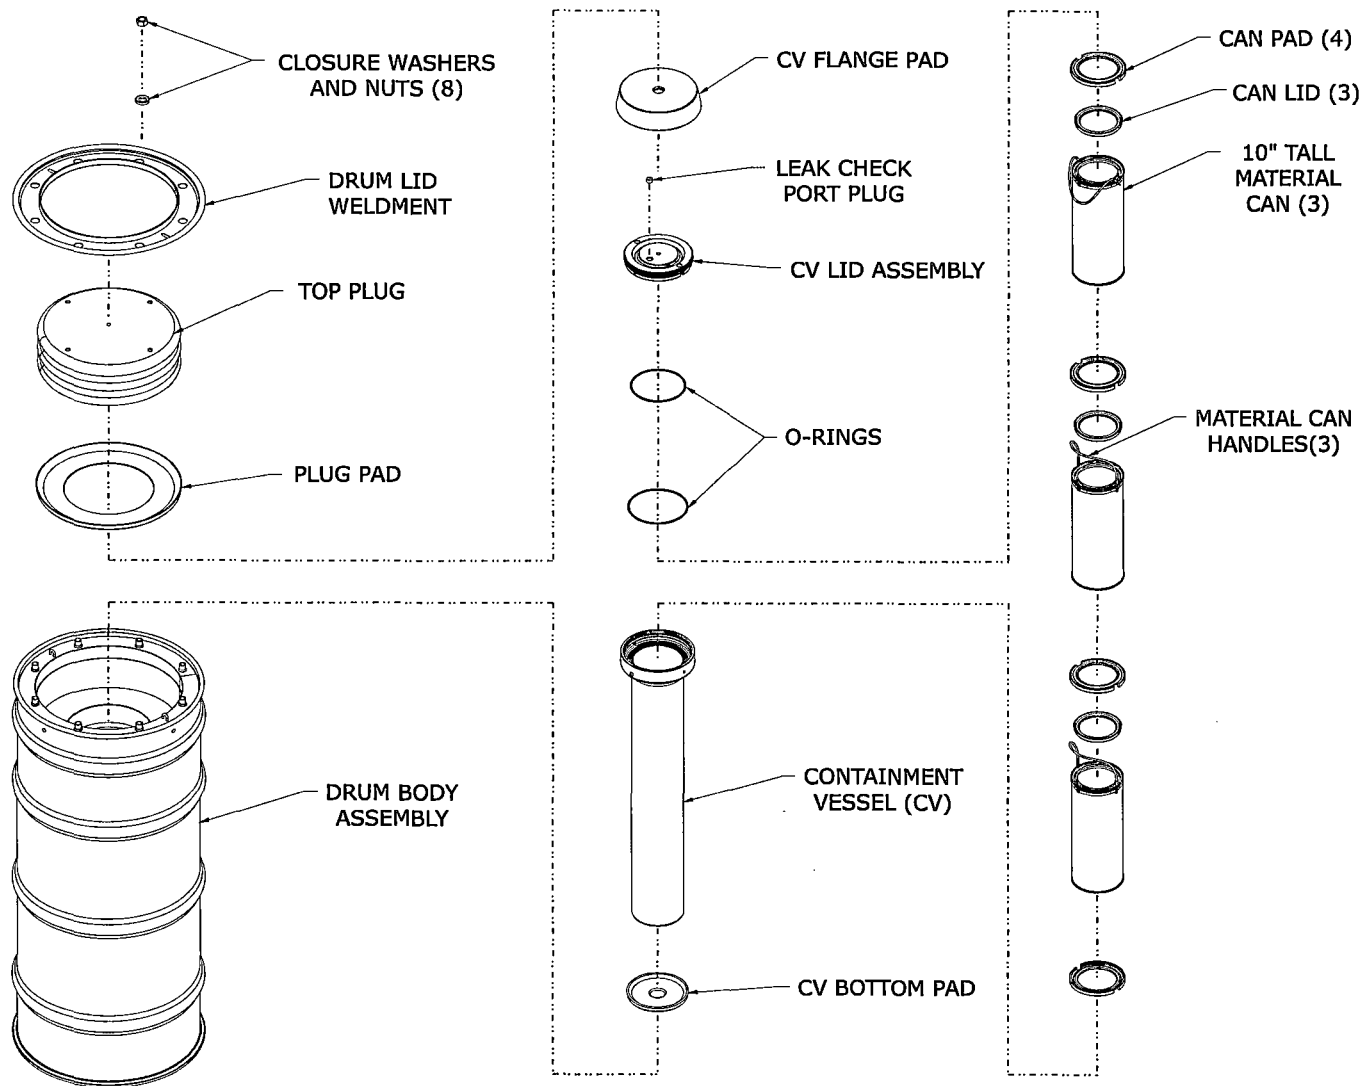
Exploded view of the ES-3100 package with bulk HEU contents.
